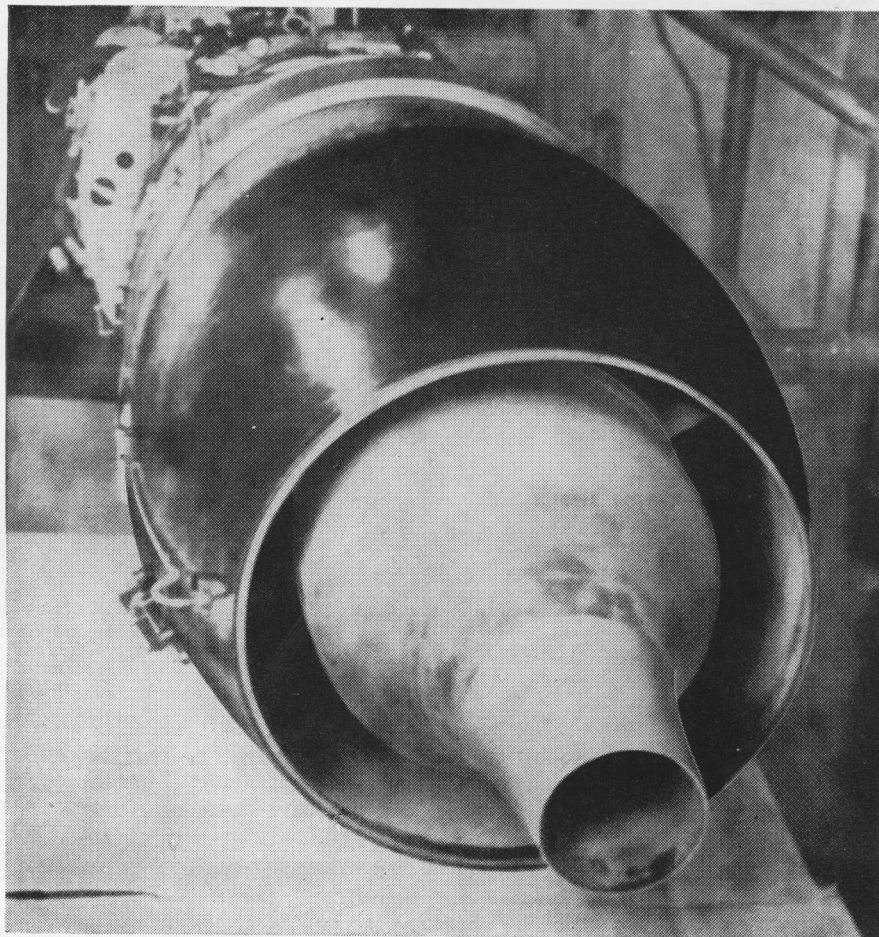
Rear view of the 003 jet engine, showing the exhaust nozzle and "bullet."
